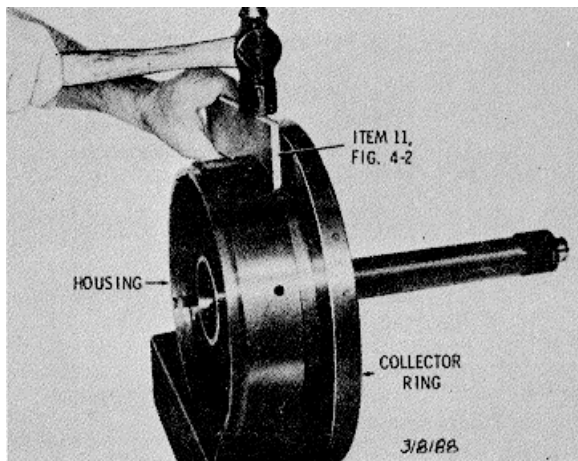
Staking pivot collector ring to forward clutch housing
